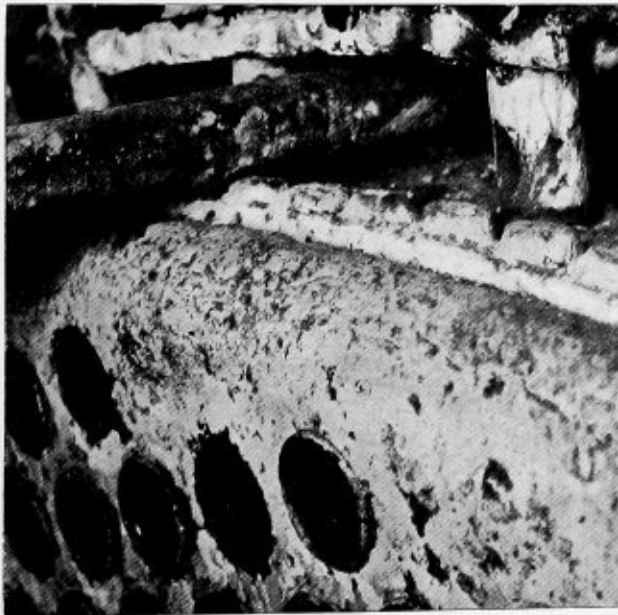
CRACKS IN BACK FLUE SHEET DUE TO CRIMPING ACTION OF SHEET
